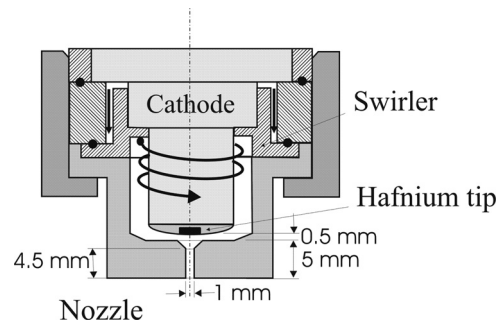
Schematic of the arc torch indicating several geometric dimensions.
